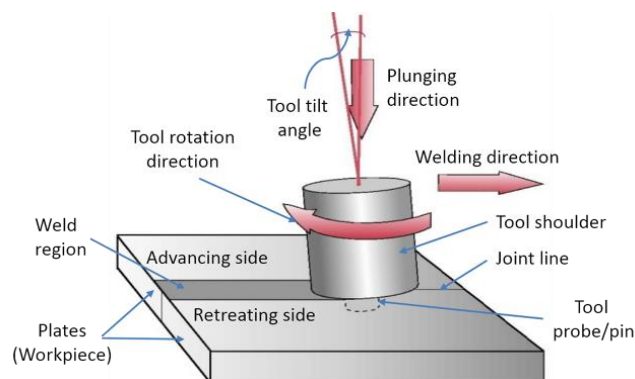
Schematic representation of friction stir welding process [1, 2]
